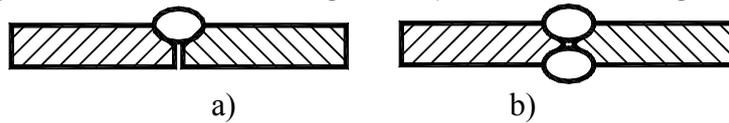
One-sided (a) and two-sided (b) welds
